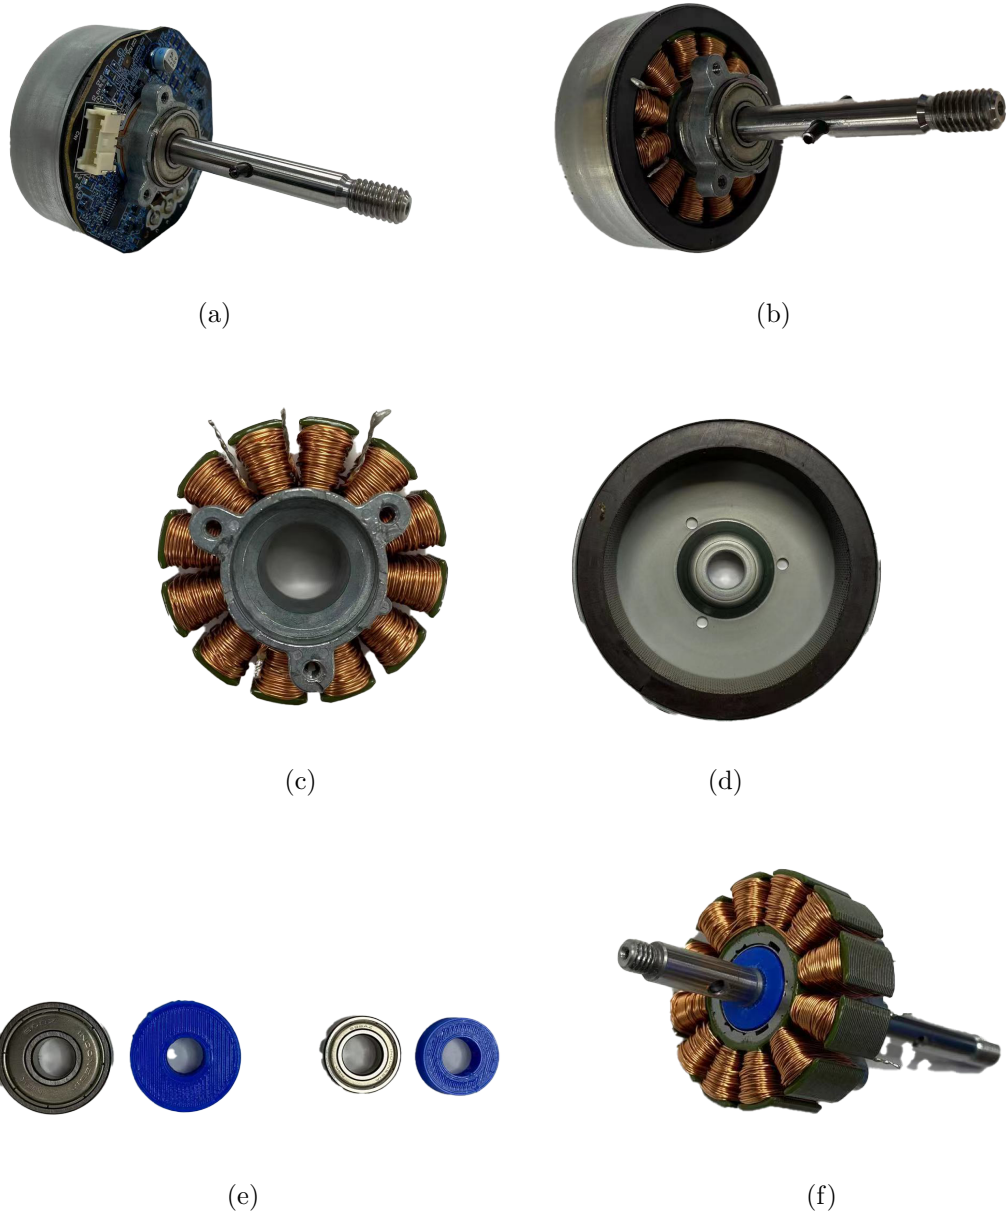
E-type PMSM motor disassembly and setup for the special stationary testing. (a) E-type motor with integrated power electronic drives, (b) E-type motor with PCB drive removed, (c) stator winding profile, (d) external rotor profile, (e) bearings and 3D printed spacers (PLA+ material), and (f) E-type motor re-assembled with PLA+ spacers and set up for stationary testing.
